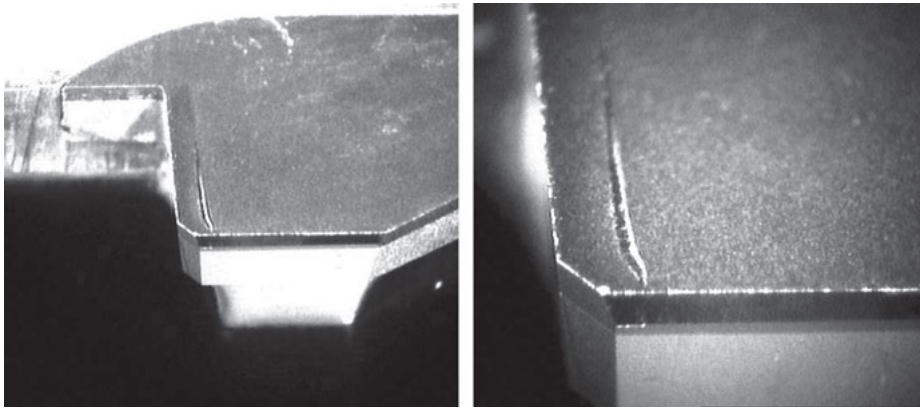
A crack developed on the tool rake face behind the tool-chip contact area due to high contact stresses on the rake face.
